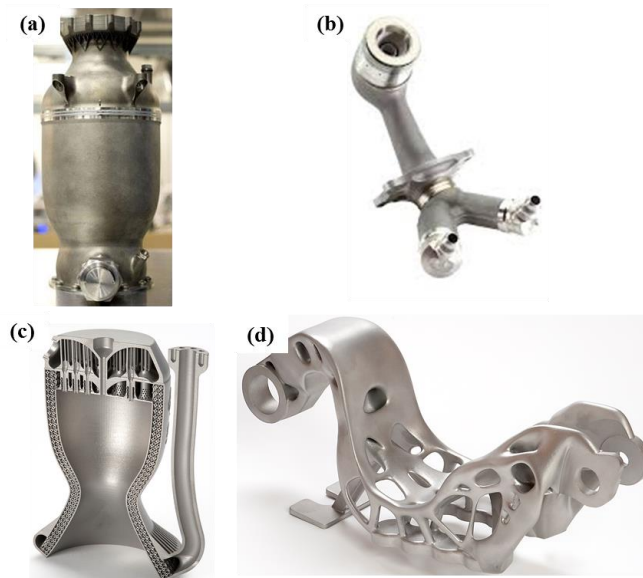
Example parts for aerospace applications: (a) Combustion chamber in SuperDraco thruster engine, (b) Leap fuel nozzle in GE90 jet engine, (c) Monolithic Thrust Chamber - Cell Core GmbH, (d) Gooseneck Kueger Flap Actuation Bracket - Asco Industries [191-194]
